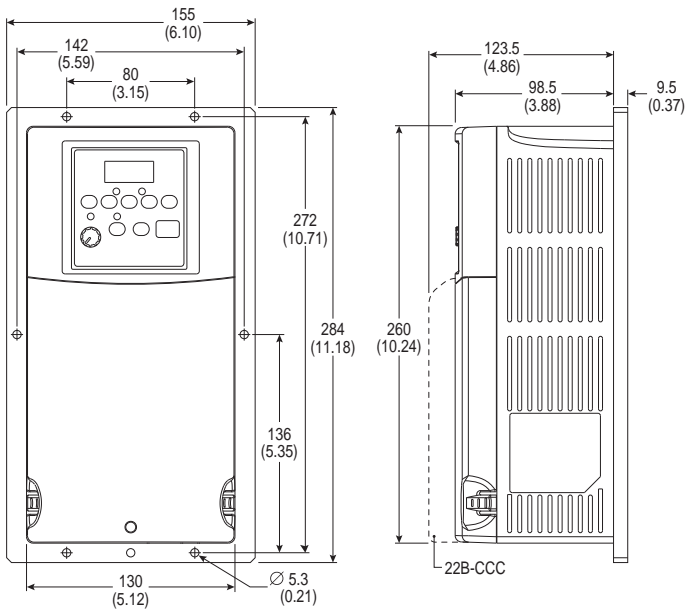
PowerFlex 40 Replacement Plate Drive Dimensions – Dimensions are in millimeters and (inches)
